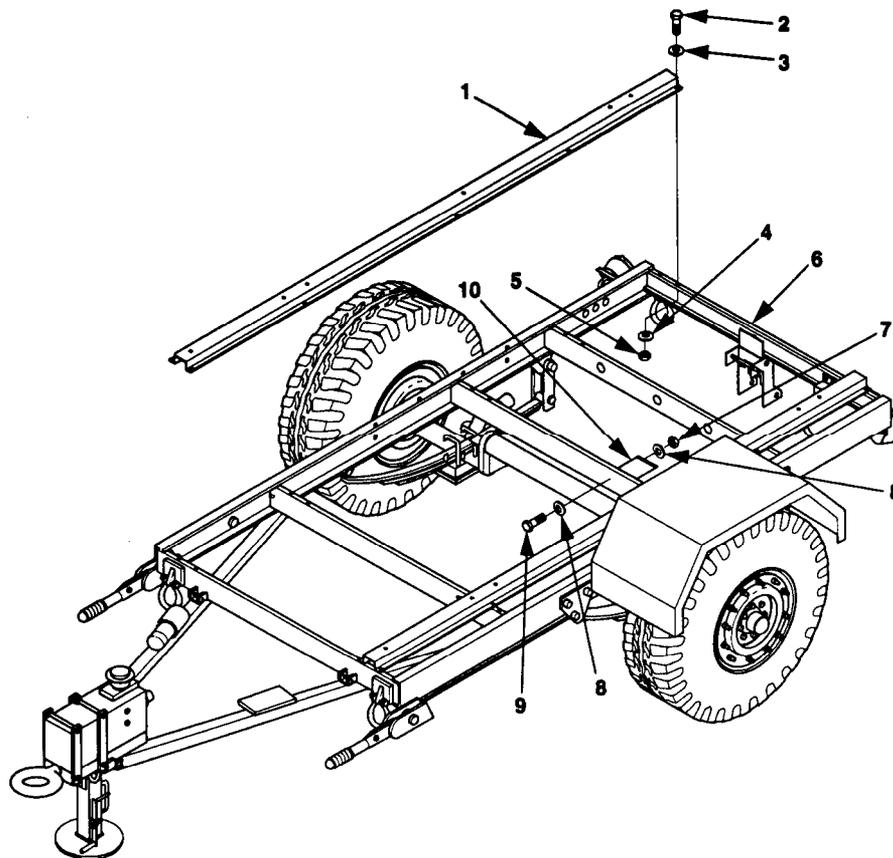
Generator Mounting Rails on 1 Ton Trailer.
